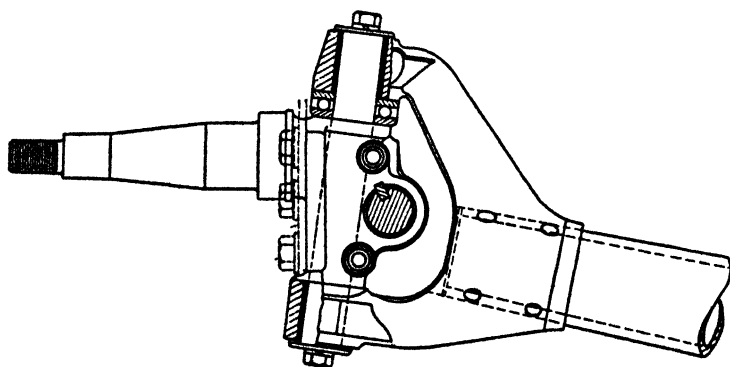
ELLIOTT-TYPE STEERING HEAD ON TUBULAR FRONT AXLE.
